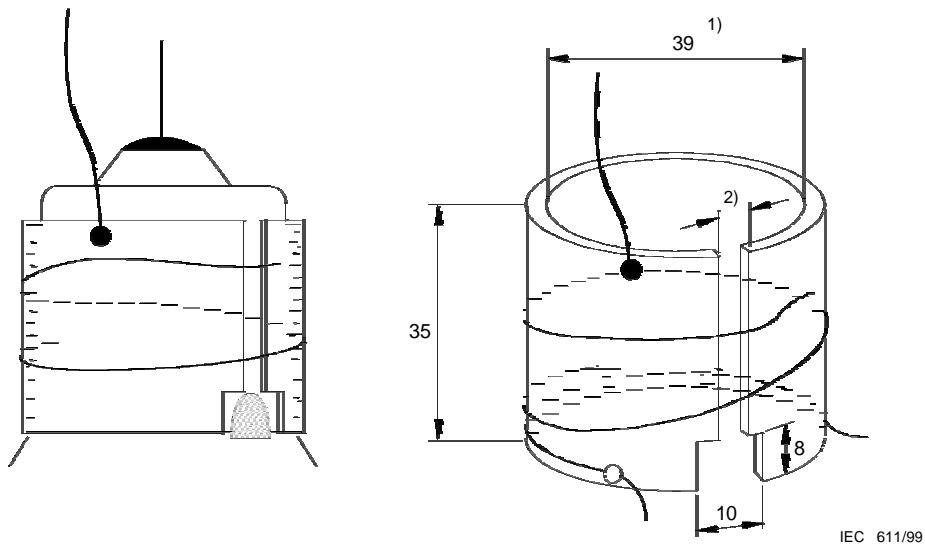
Approximate dimensions of test lampholder for E17/20 cap
